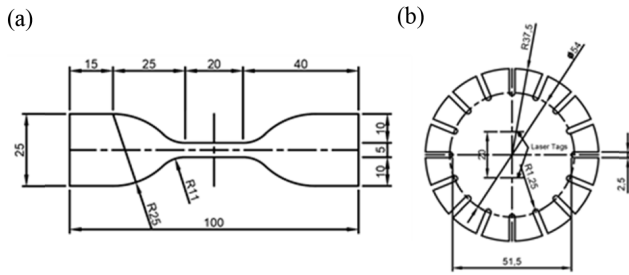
Shape and dimensions of specimens for (a) uniaxial tensile test; (b) biaxial tensile test.
